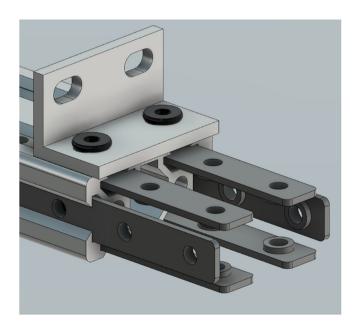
CAD model of the assembly of the aluminum extrusion with an L bracket attached to the MAKERLINKs.
